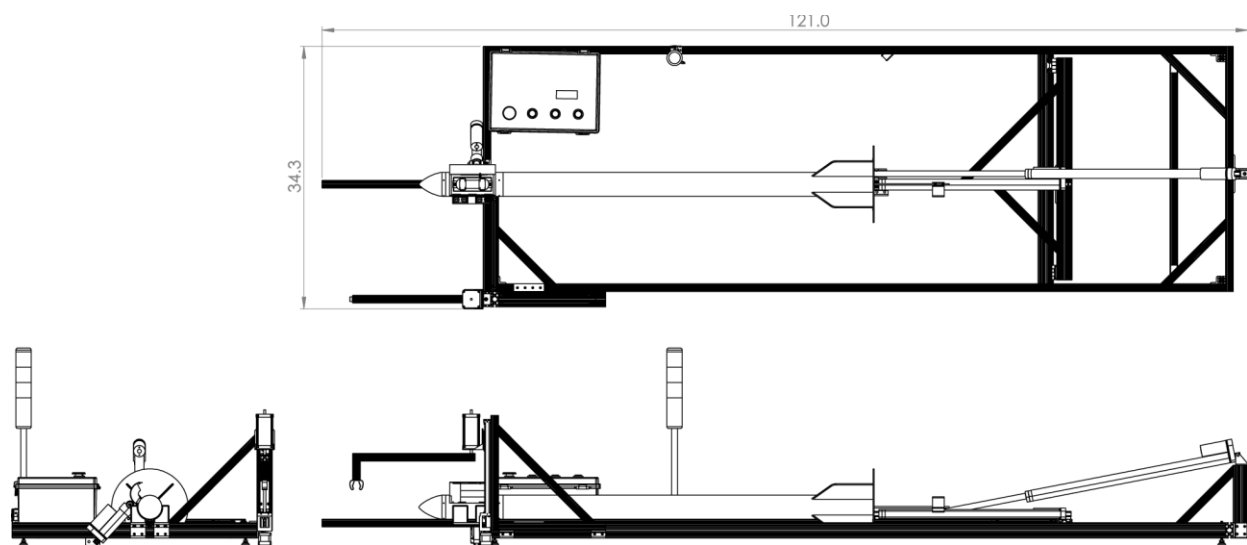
Line drawing views of AGSE superstructure in horizontal payload-loading configuration. The structure is 121 x 34.3 inches the horizontal configuration. Payload manipulator robot arm and body tube stabilizer are shown.
